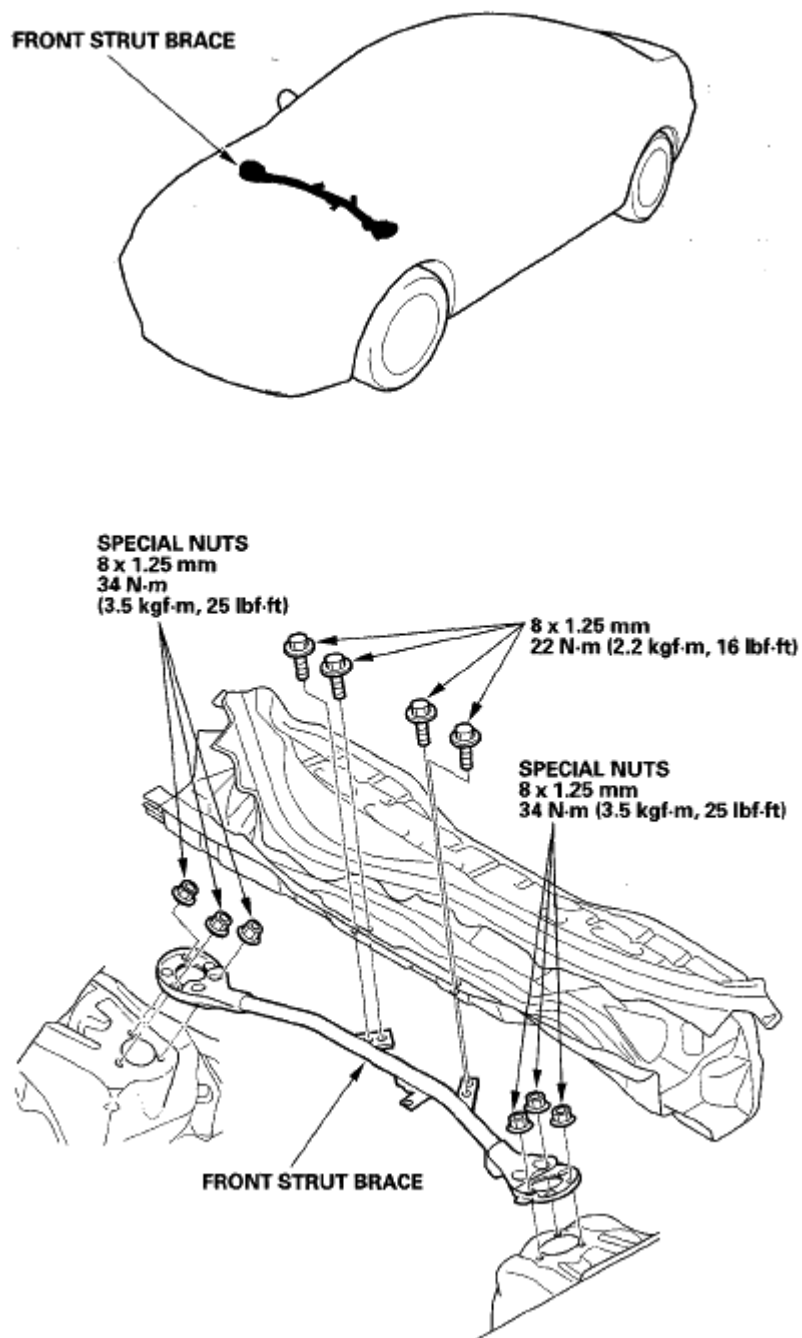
Identifying Frame Brace Components With Torque Specifications
